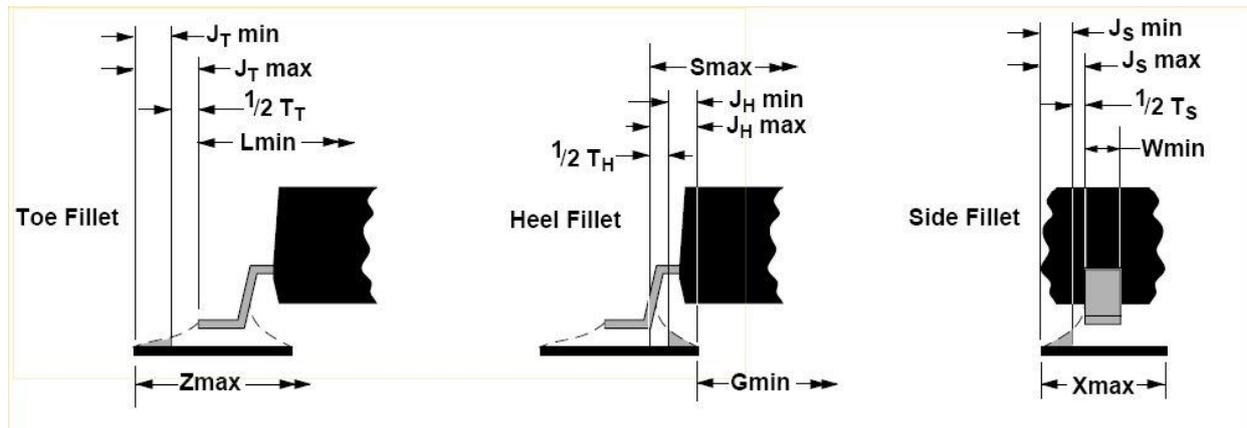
Solder joint geometry and the characteristic dimensions (Source: IPC 2005)
